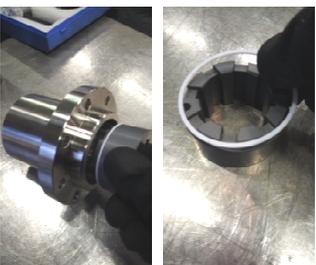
Pull out the rear bearing bush (545) and the gasket (411.x).
